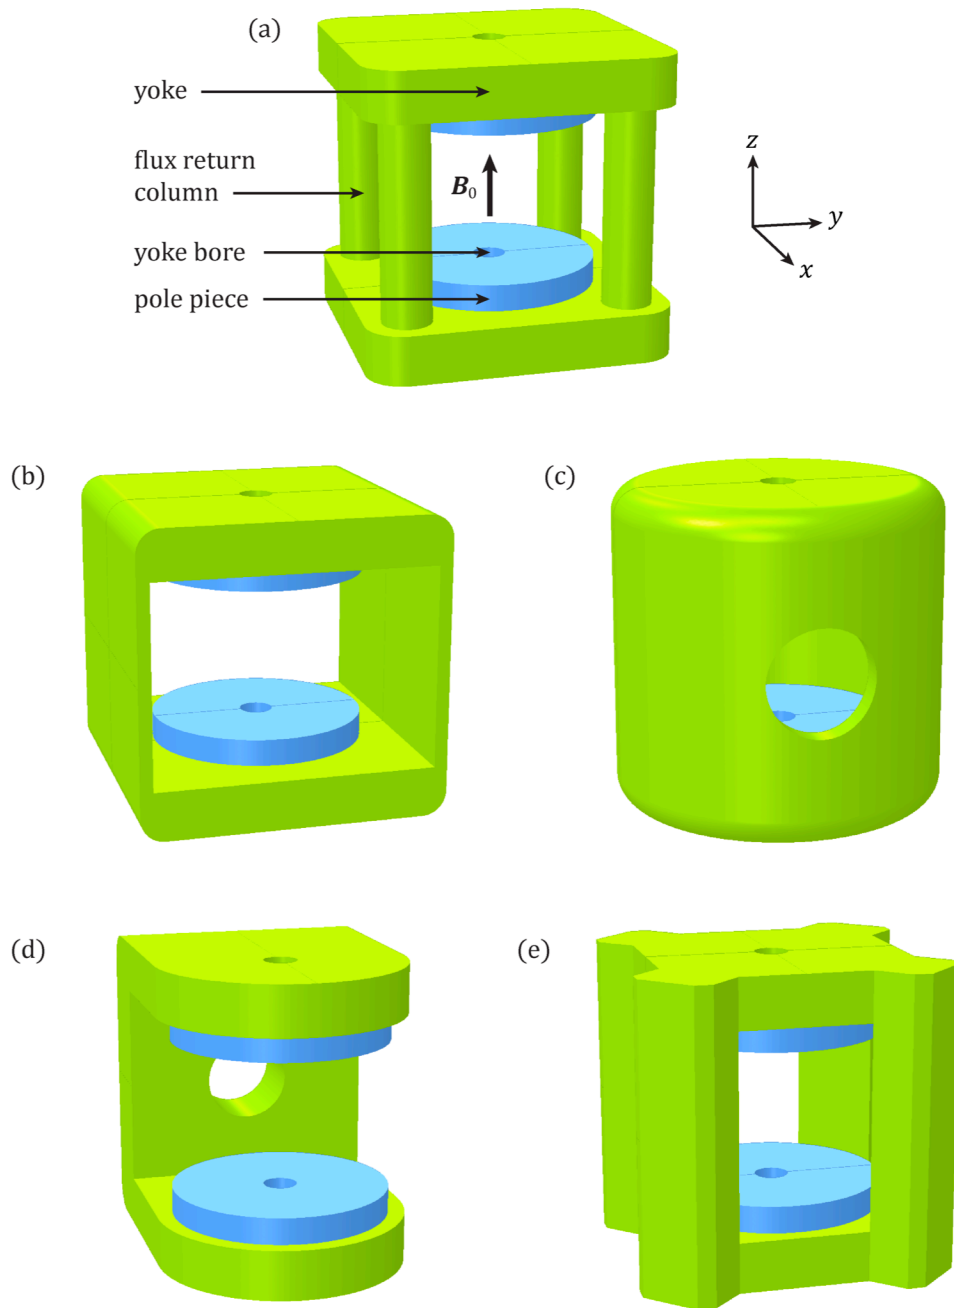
Three-dimensional illustrations of the magnet geometries investigated in this work: (a) a standard four-column design with cylindrical posts (S4); (b) an H-box design with two open sides (HB); (c) a closed cylindrical pill-box design (PB); (d) a C-shaped design (CS); and (e) a modified four-column design (M4).
